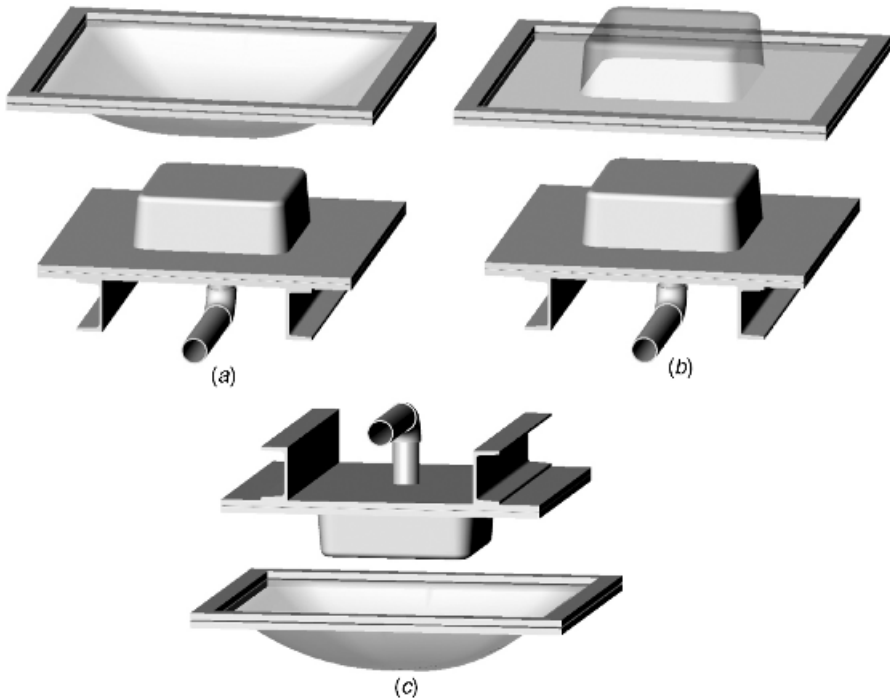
Male mold: (a) drape; (b) drape formed; (c) top platen.
